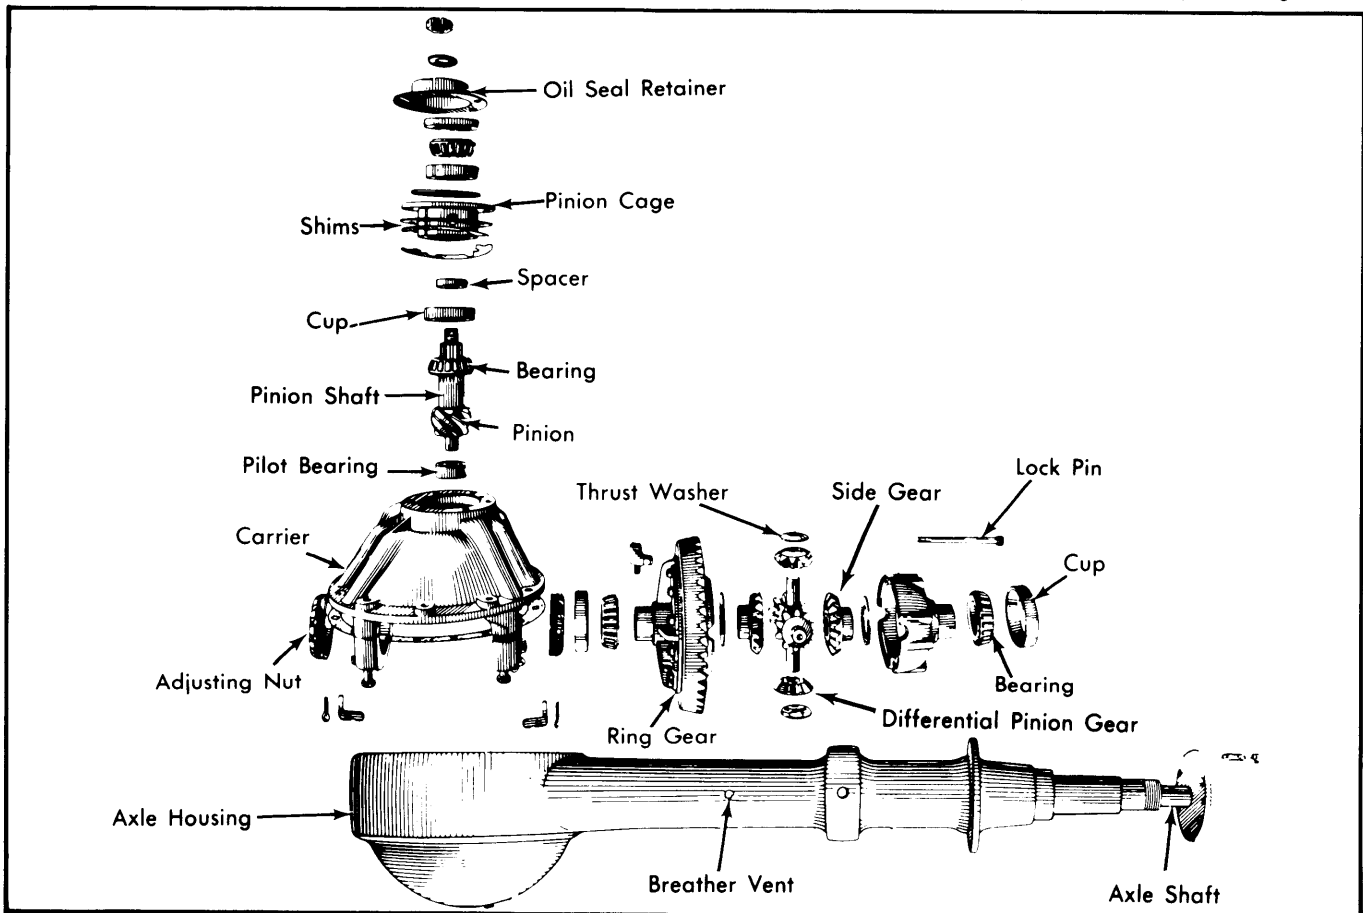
Exploded View of IHC Full Floating Axle Assembly
